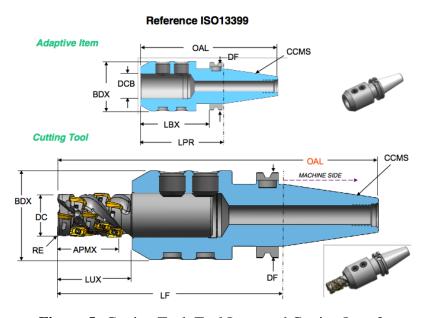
Cutting Tool, Tool Item, and Cutting Item 2
